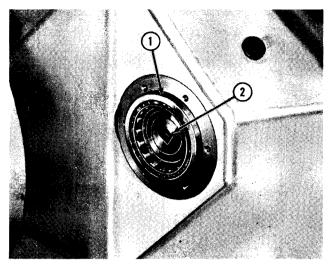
REPLACING OUTER BEARING 1. Bearing 2. Pinion
